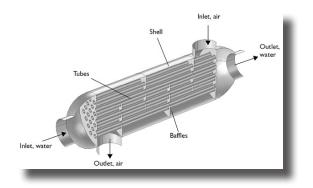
1-1 Shell and tube heat exchanger (1-Shell -1Tube pass) [5].
